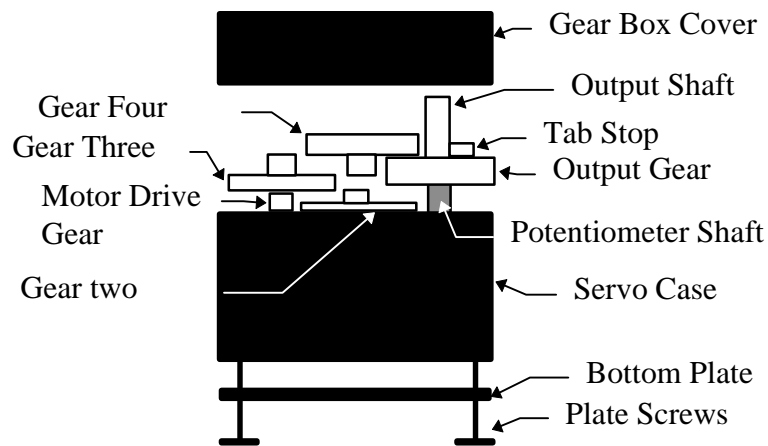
Servo hack: Remove tab stop, remove potentiometer tab inside *Output Gear*, set potentiometer shaft at center setting.
